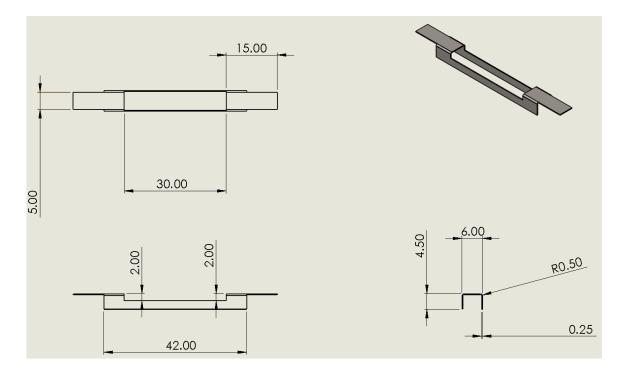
Drawing of the Front support piece, with dimensions in inches.
